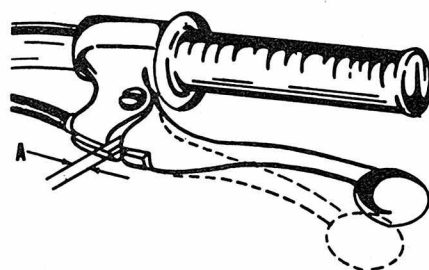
The clutch hand lever should have 0.12 inch free play at (A).
